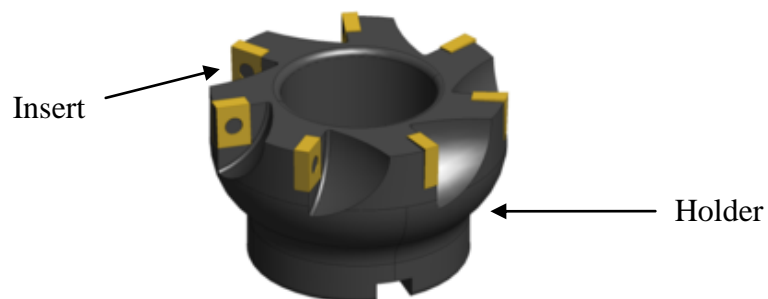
Carbide or ceramic inserts face mill cutting tool (taken from Wikipedia)
